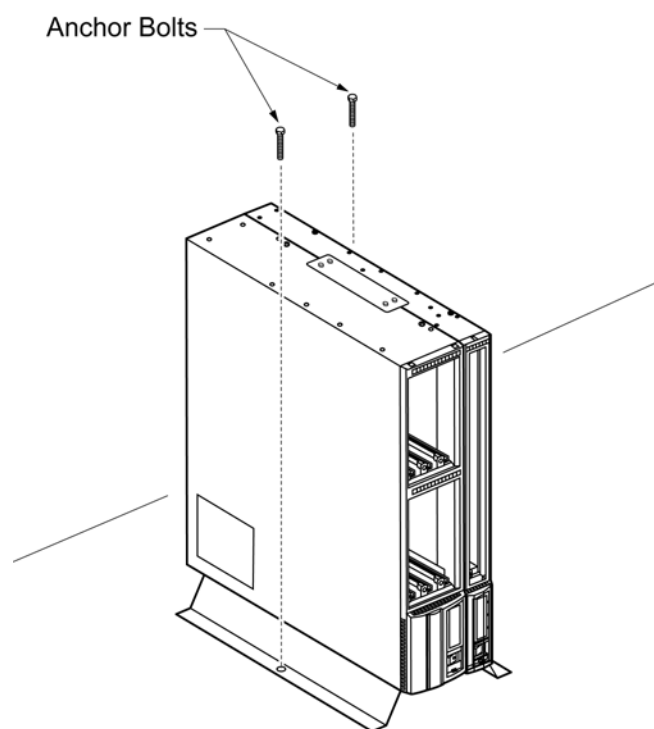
CHS2U-AU/CHS1U-AU Chassis Stand Mount
